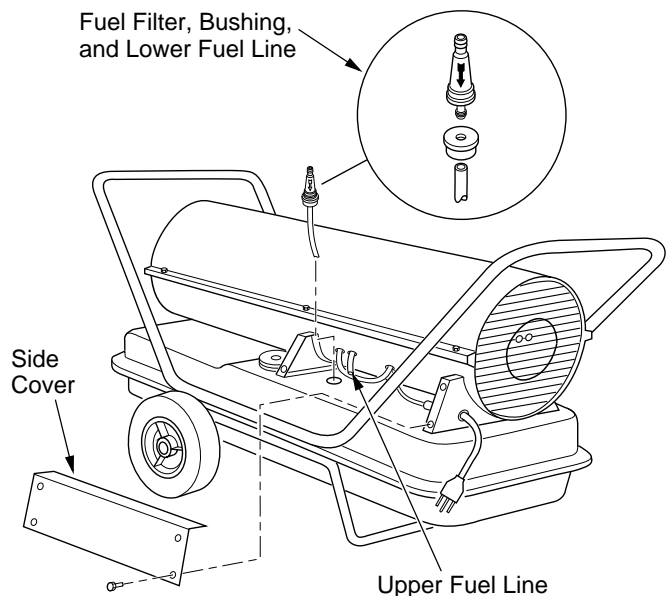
Fuel Filter Removal, 110/115/155/165 Models
